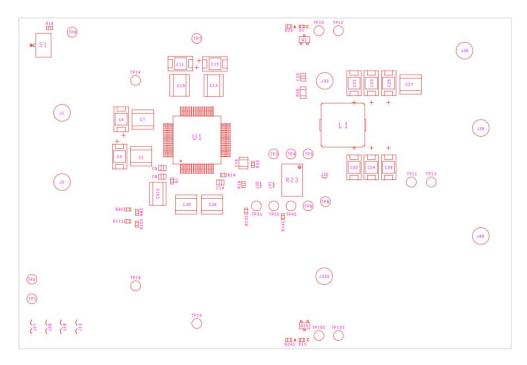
TOP LAYER COMPONENT PLACEMENT
